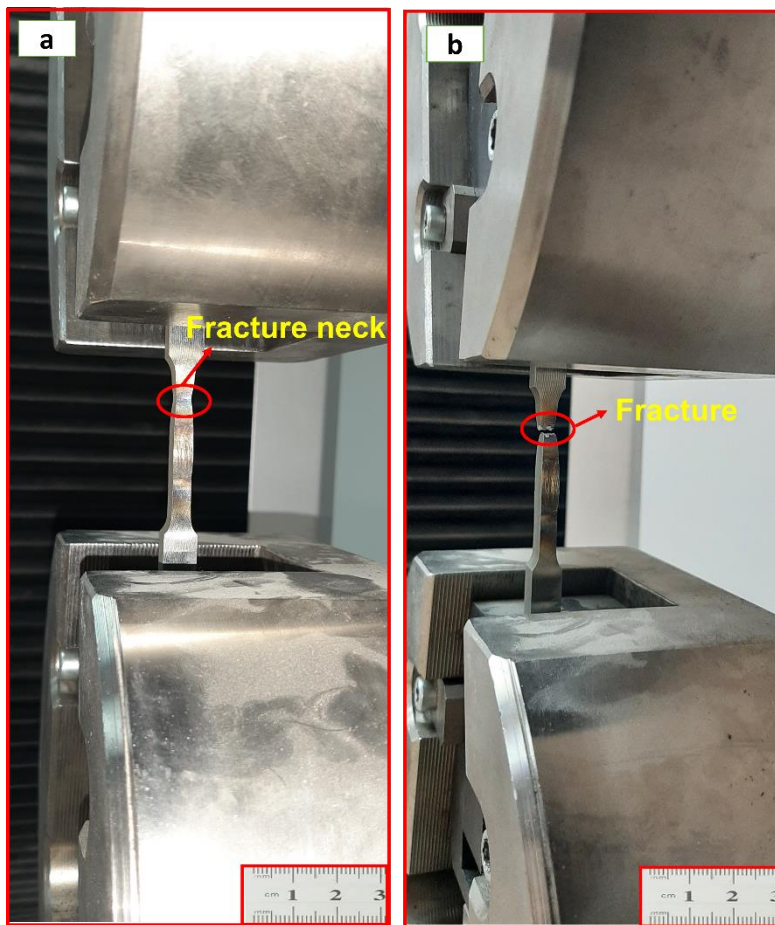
(a) The specimen of welded joint during the tensile test, (b) The specimen of welded joint after tensile test.
